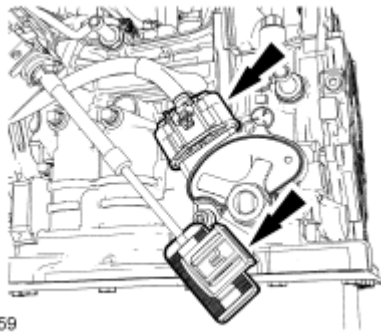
Locating Transmission Range (TR) Sensor Electrical Connector And Selector Lever Cable End
